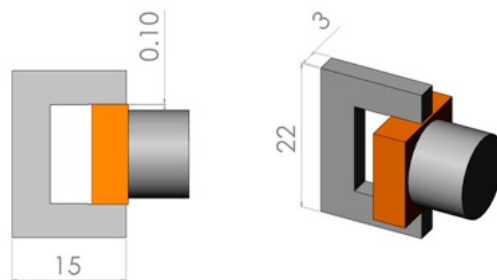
U-shape specimen for cutting force measurement experiments. Dimensions in millimeters are illustrative.
